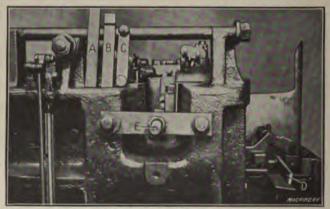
Making Draw-bar Hangers in a 3-inch Ajax Forging Machine
